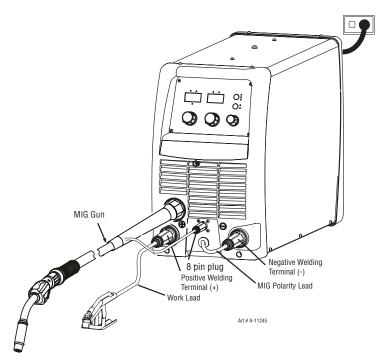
Setup for MIG Welding with Gasless MIG Wire
